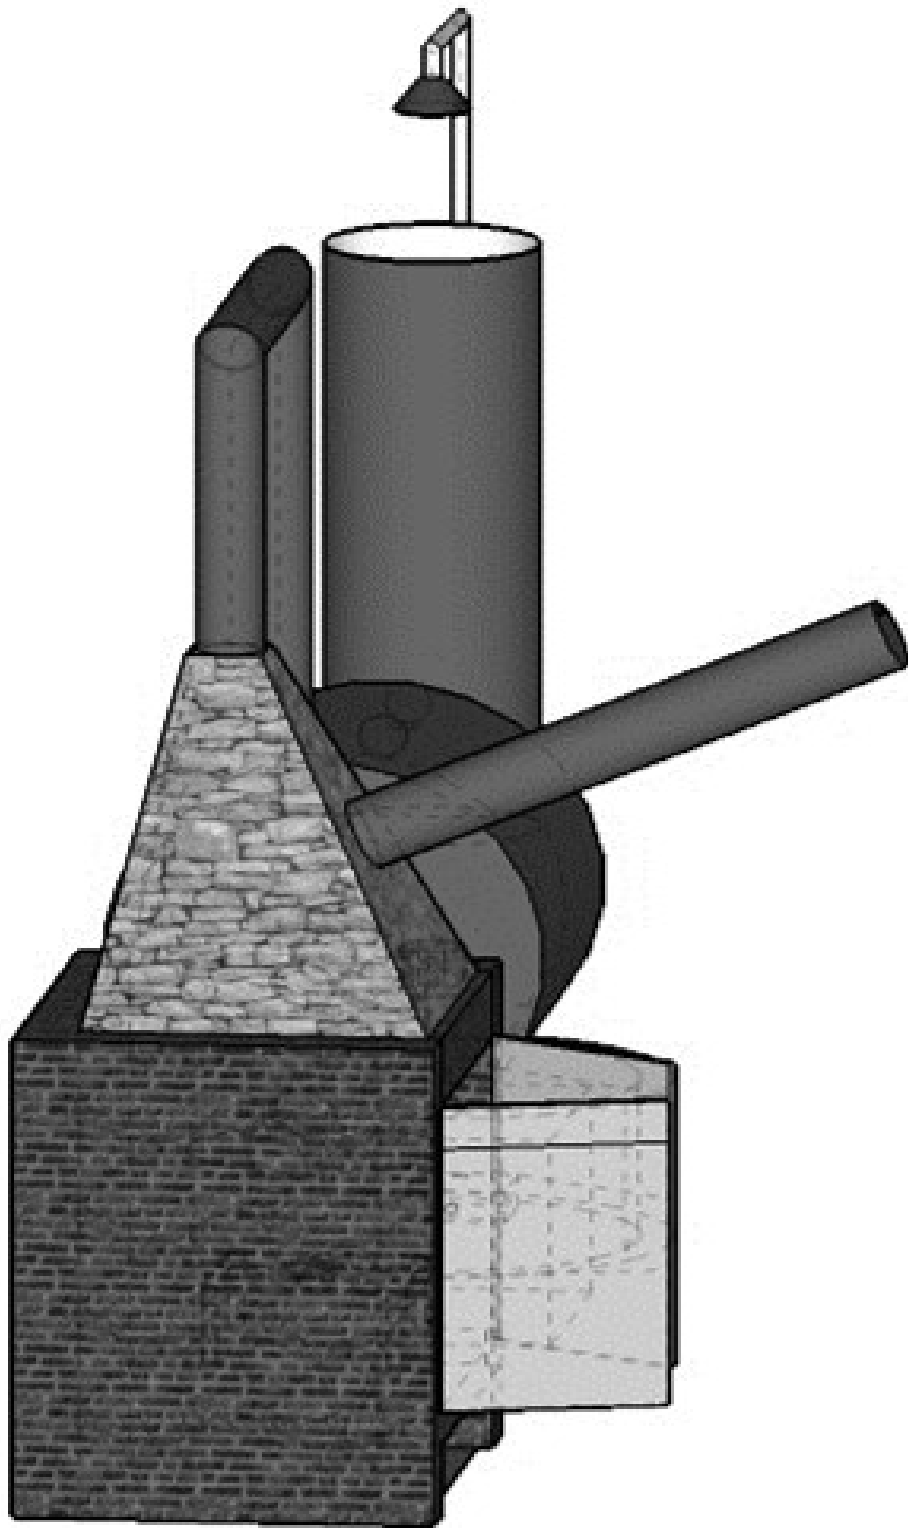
Liquid smoke flavoring preparation assembly left view
